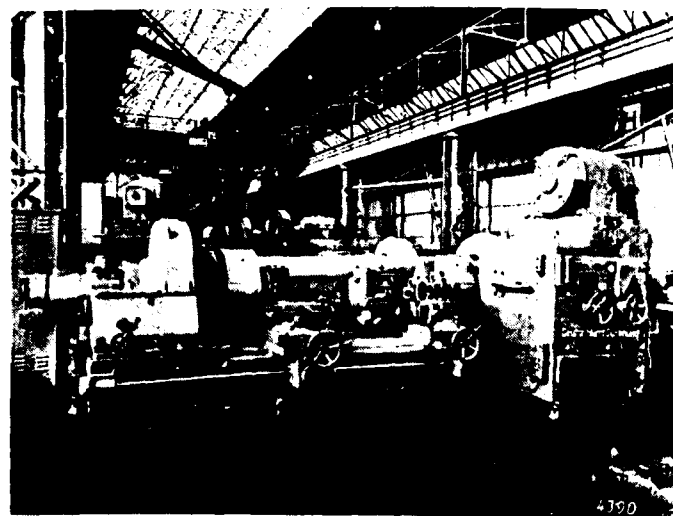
MFD Wheel lathe for wheel sets with outside journals.
